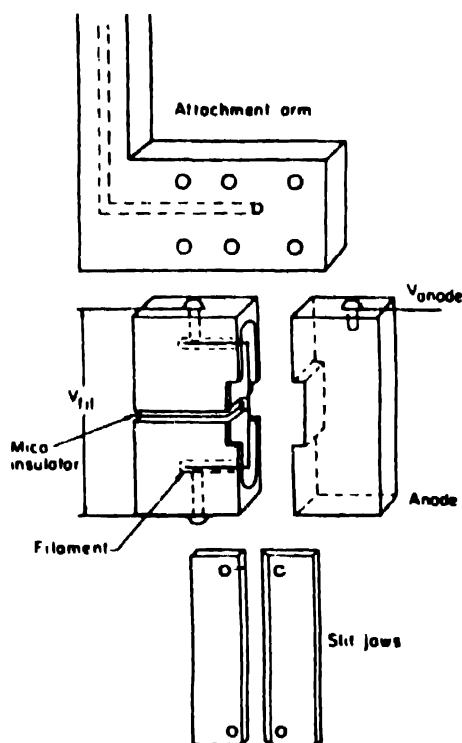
Exploded view of the electron gun. Some mica spacers are not shown for clarity.
